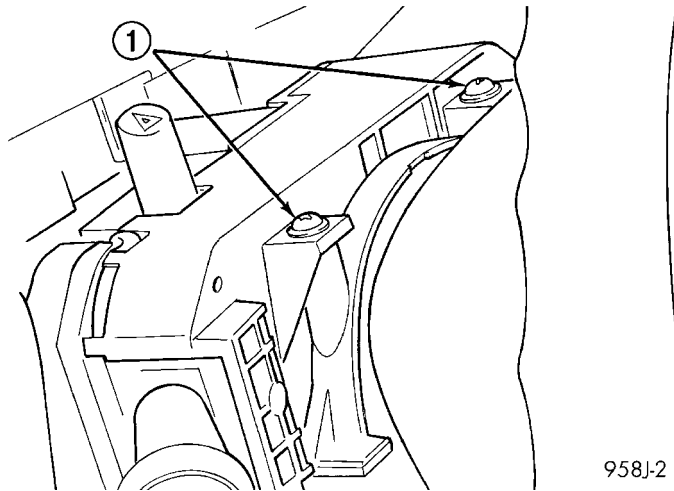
MULTI-FUNCTION SWITCH MOUNTING
